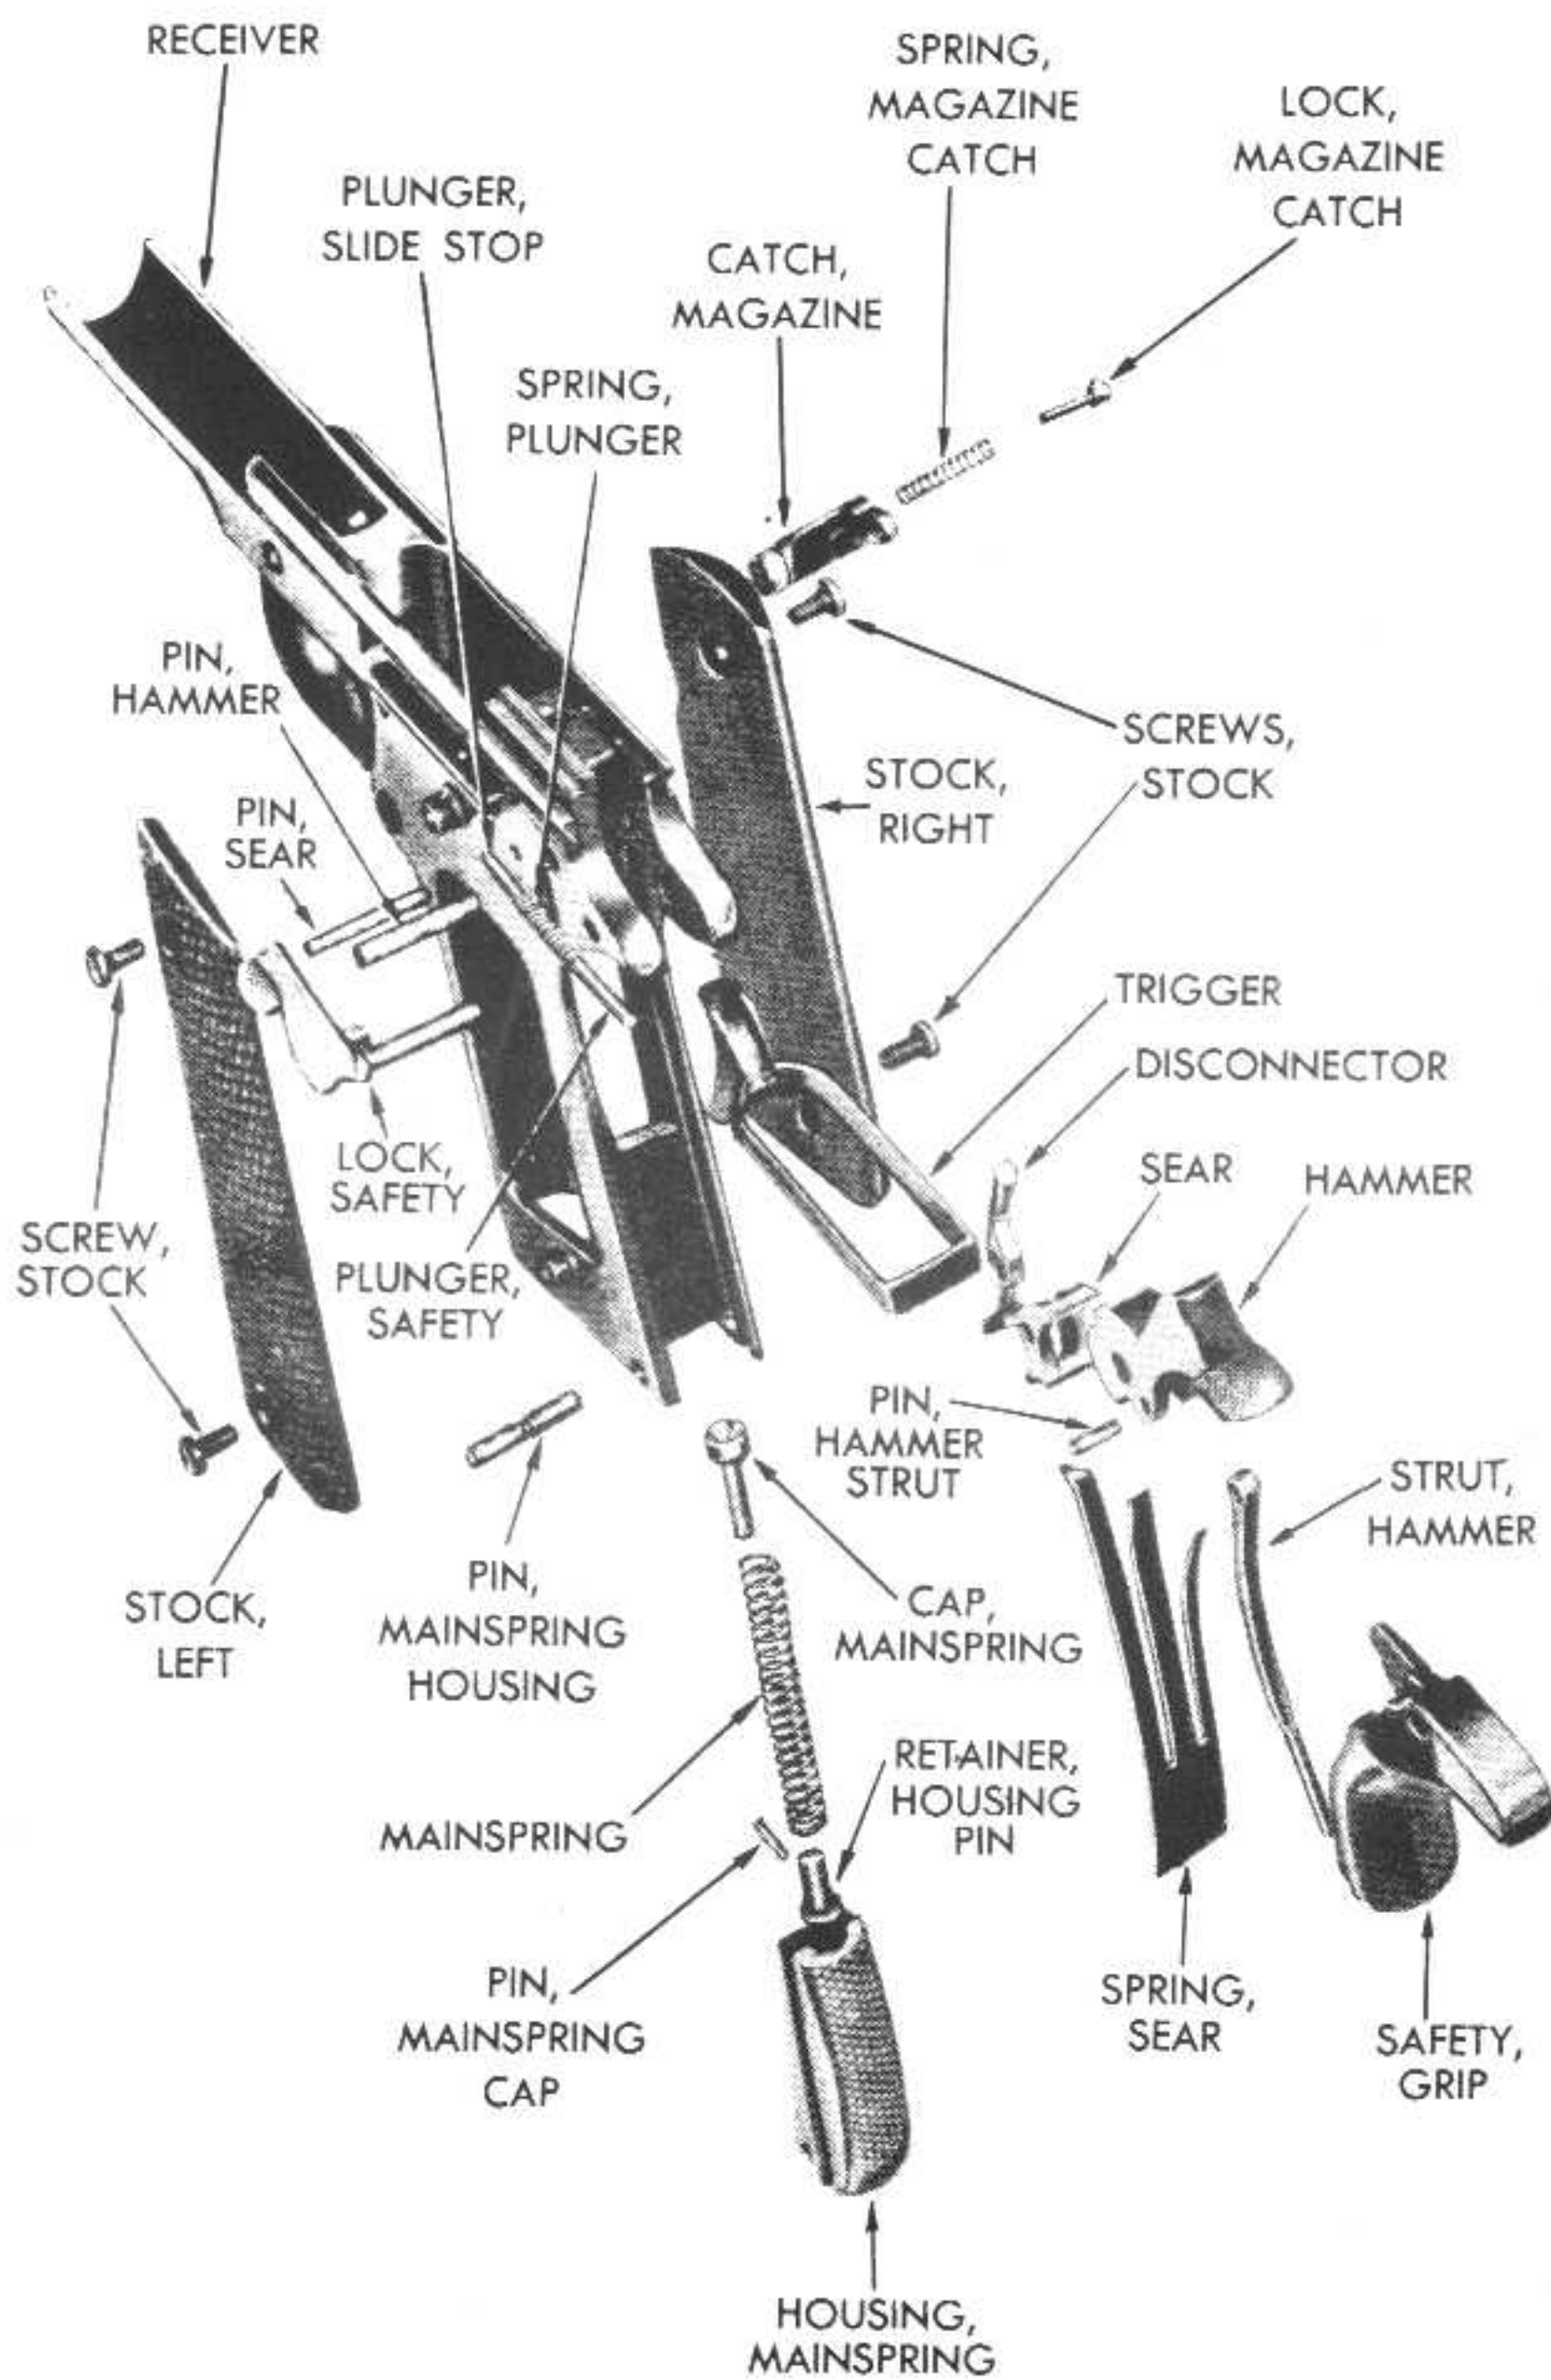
Subassemblies of Pistol M1911A1 — Exploded View
